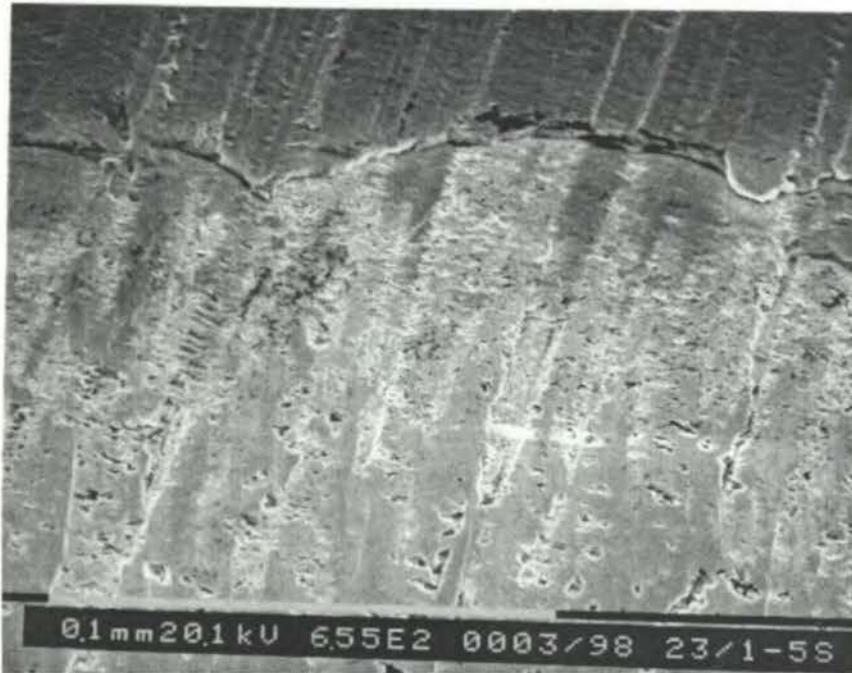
114 Magnified view of the rake face of KC720 tool in Figure 7.113 showing pealed coating, substrate pitting and galling on the rake face
